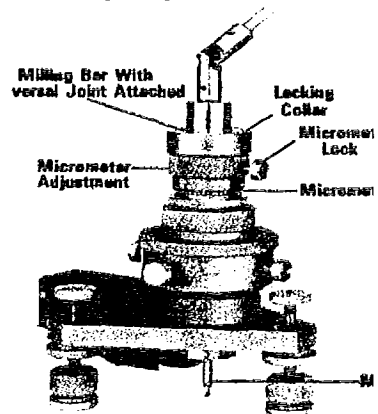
RS-200 Milling Guide, user for machining a precisely located flat-bottom hole
